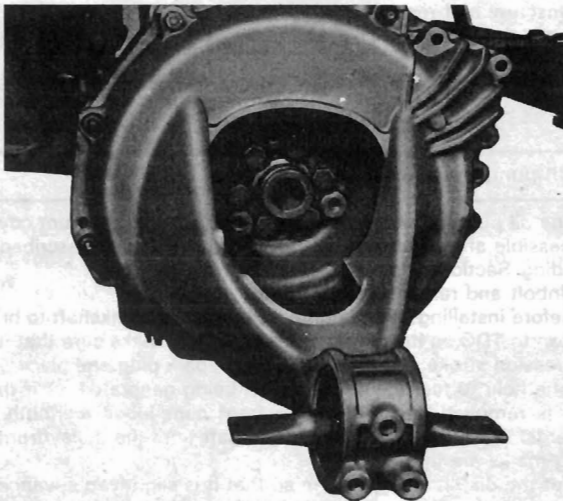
Flywheel housing and rear mounting (Sec 8)
